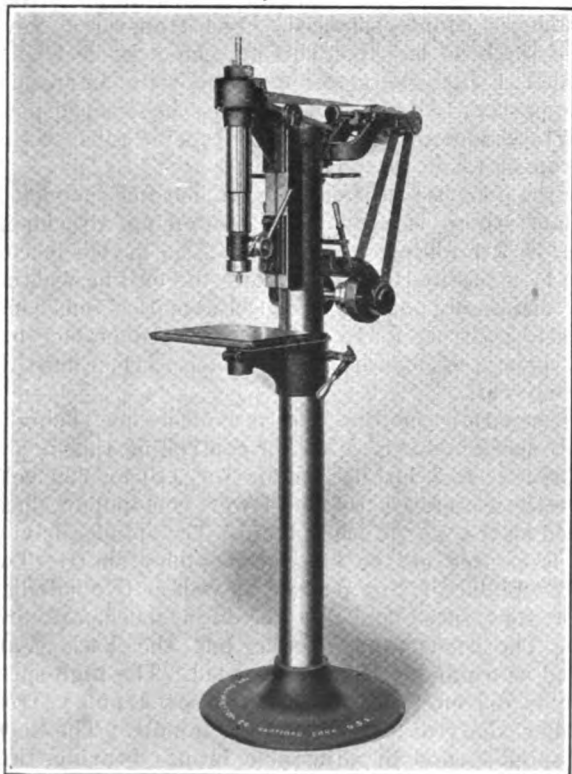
COLUMN TYPE OF HIGH-SPEED SENSITIVE DRILLING MACHINE
